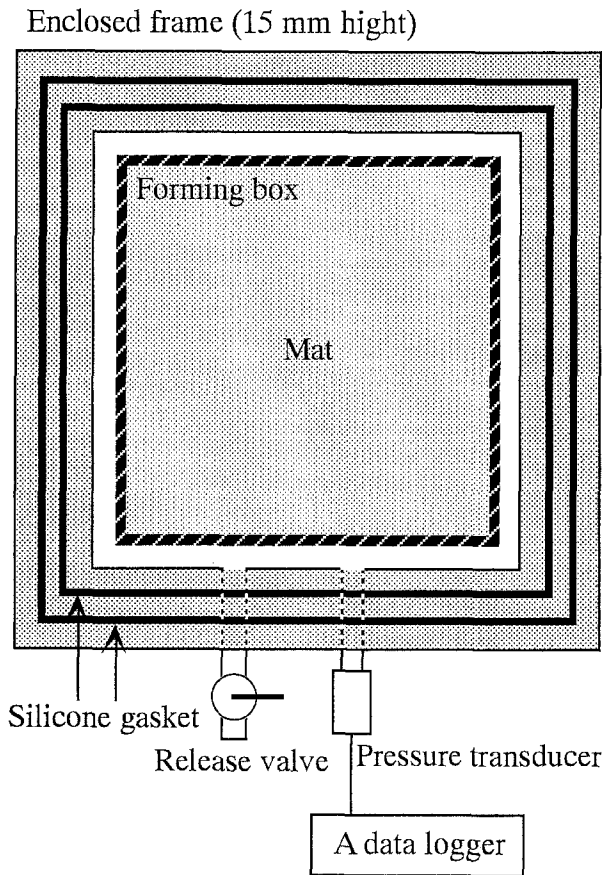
Molding apparatus in the closed-press system. Forming box was removed from the enclosed frame before pressing
